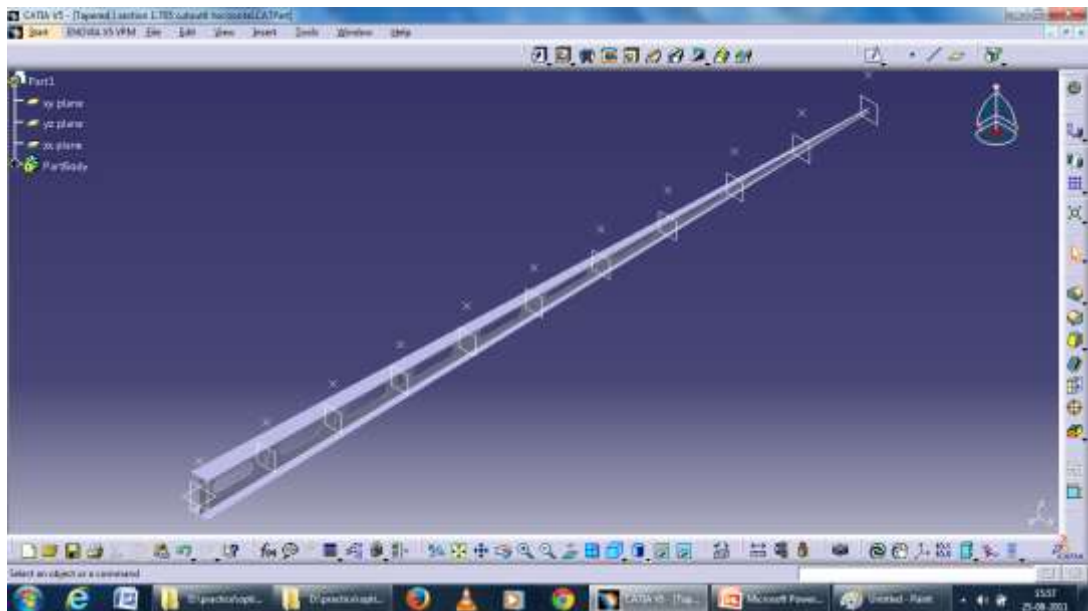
Isometric view of Tapered Spar Beam with Cut-outs
